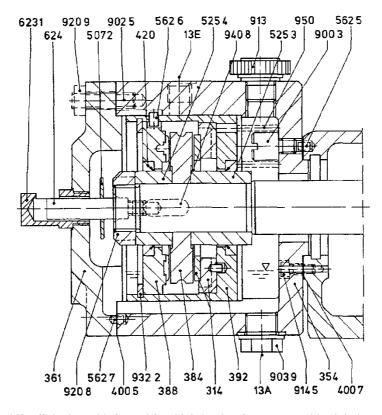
Lift-off device with forced feed lubrication for pumps with plain bearings
